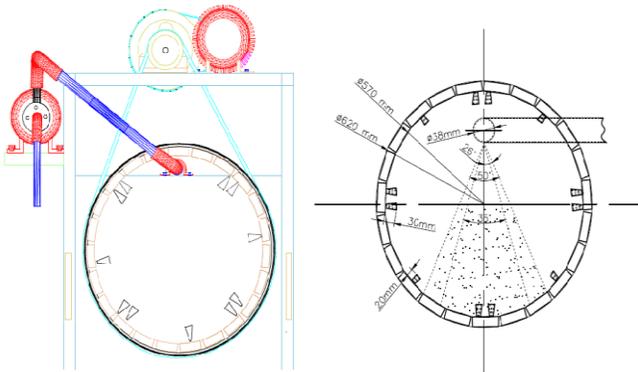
Power Transmission and Drive Assembly of Carrot Washer.
